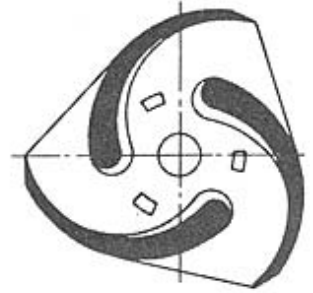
Open three-passage non-clogging impeller with cylindrical blades
